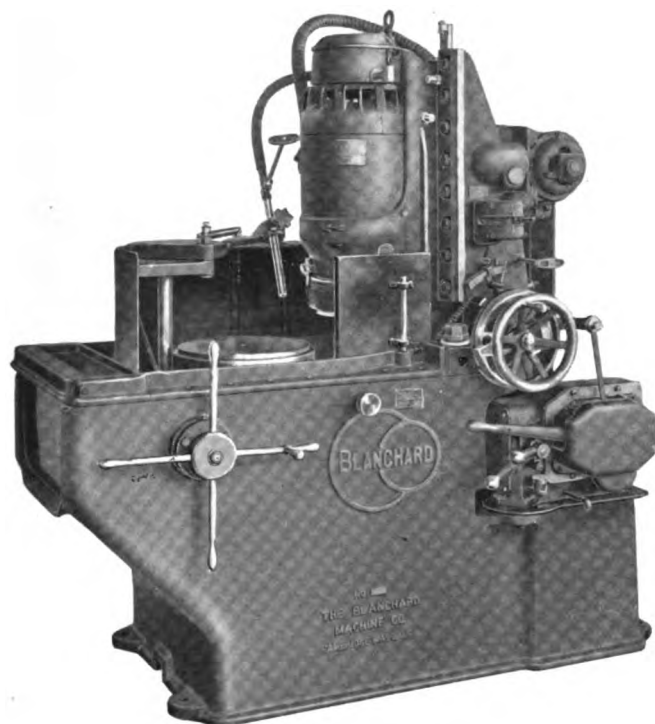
No. 10 Grinder Direct Motor Drive Type
